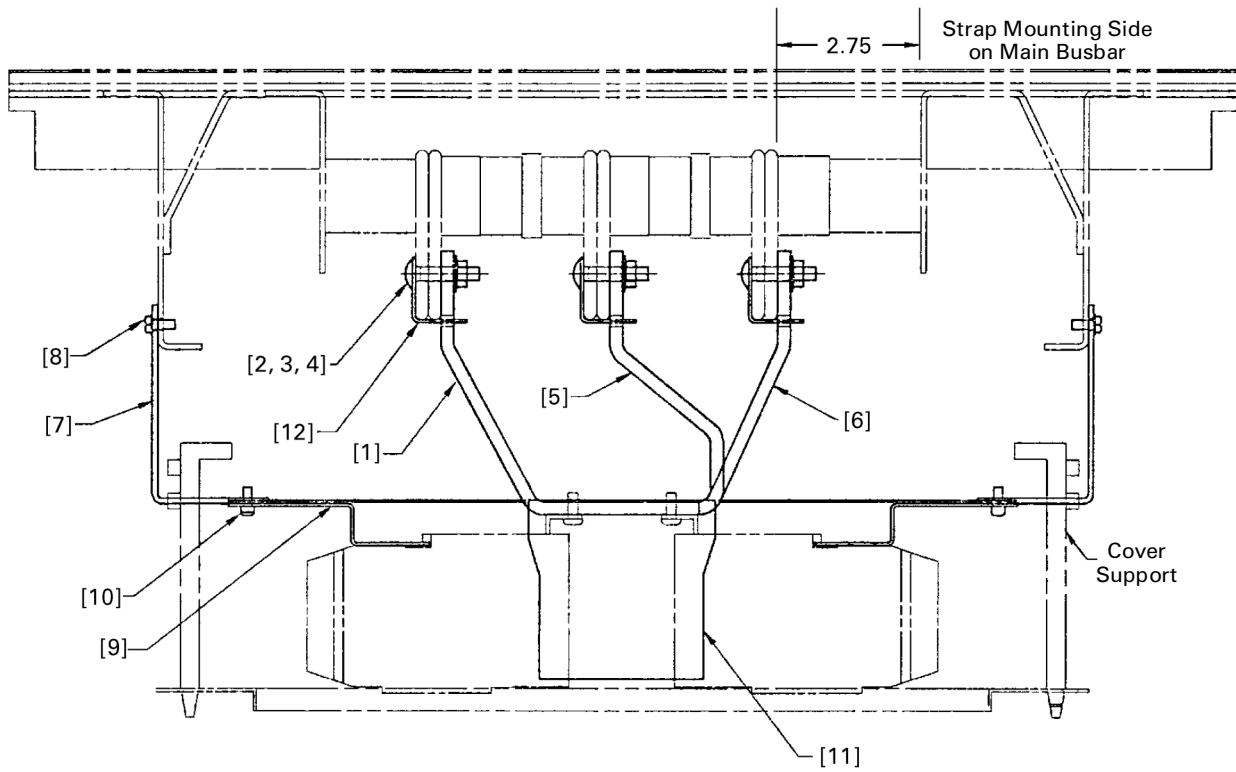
Mounting TEY circuit breakers into Spectra APNB bolt-on interiors, assembly end view.
